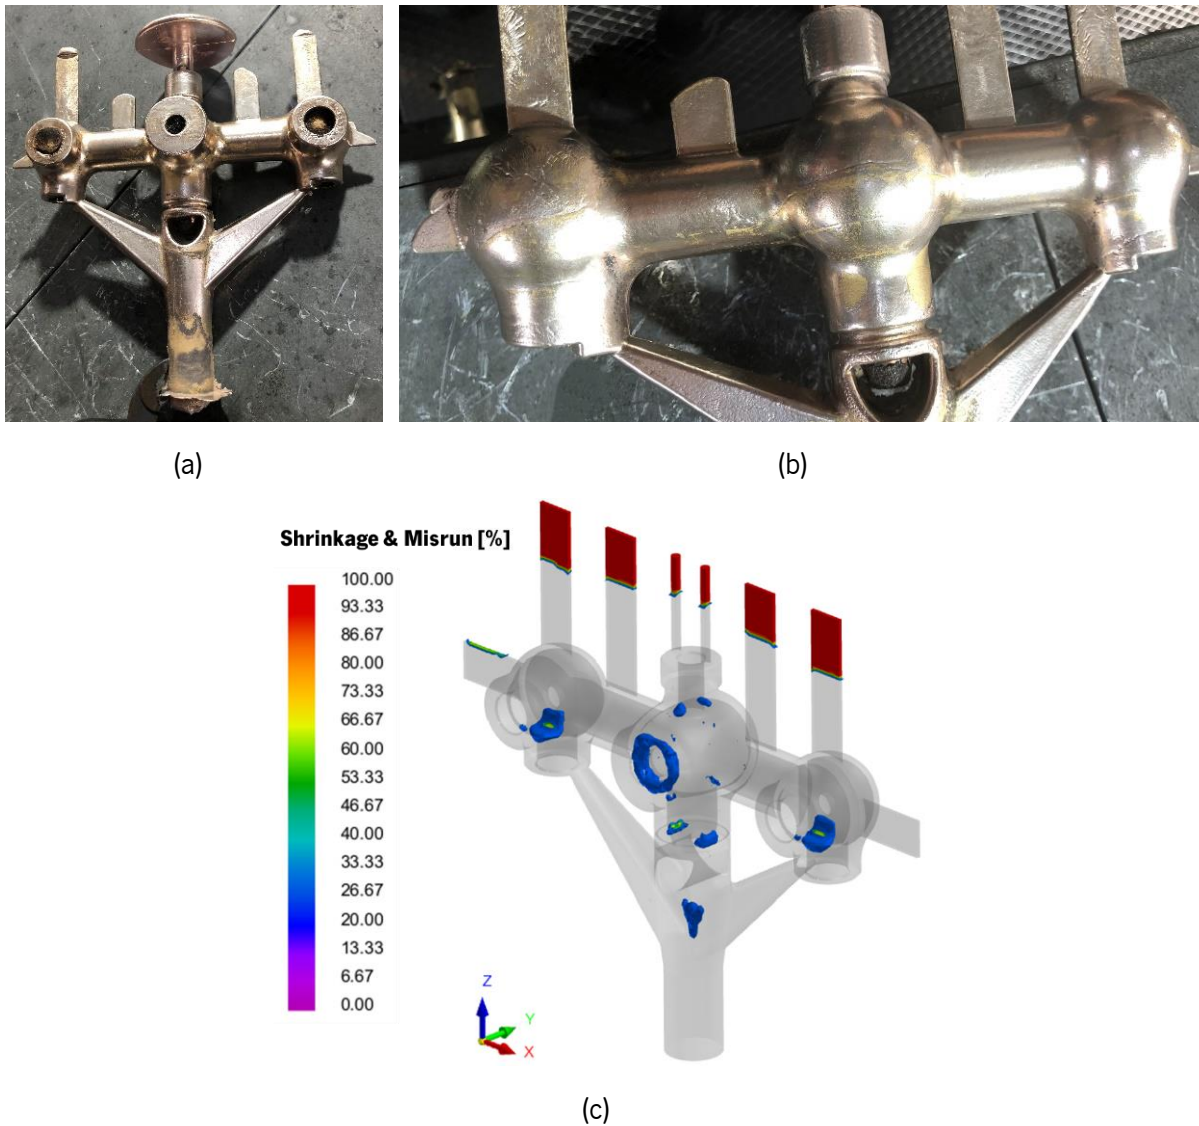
Bathtub mixer after being removed from the LPDC machine, with the gating system in (a) front view and (b) rear view; (c) Numerical results obtained for this configuration.
